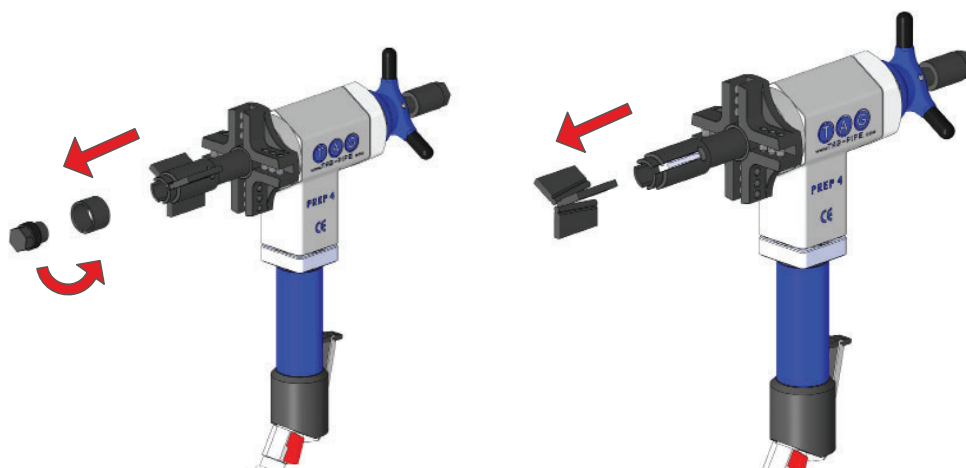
Removing shaft end nut, shaft ring and locking jaws
